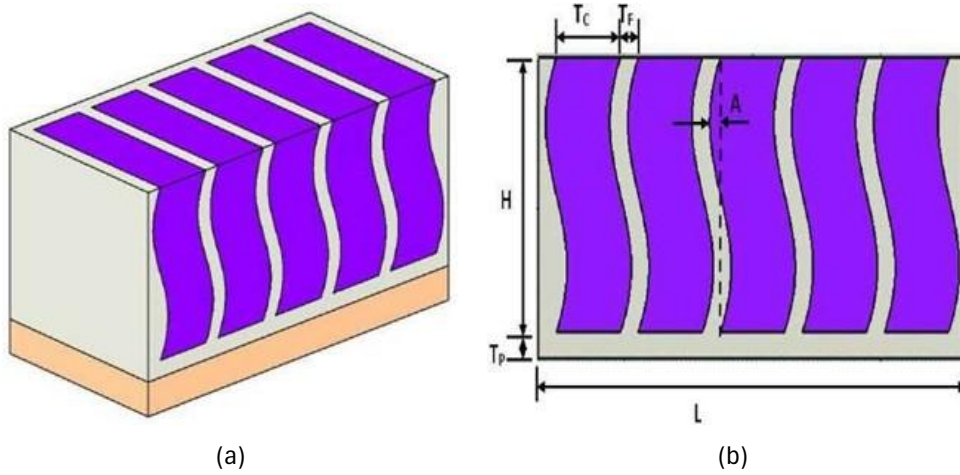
Processor cooling unit (a) Side view (b) Cross-sectional view.
